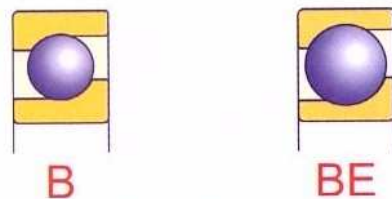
The 'E' version angular contact ball bearing (right) can take up extra capacity.
